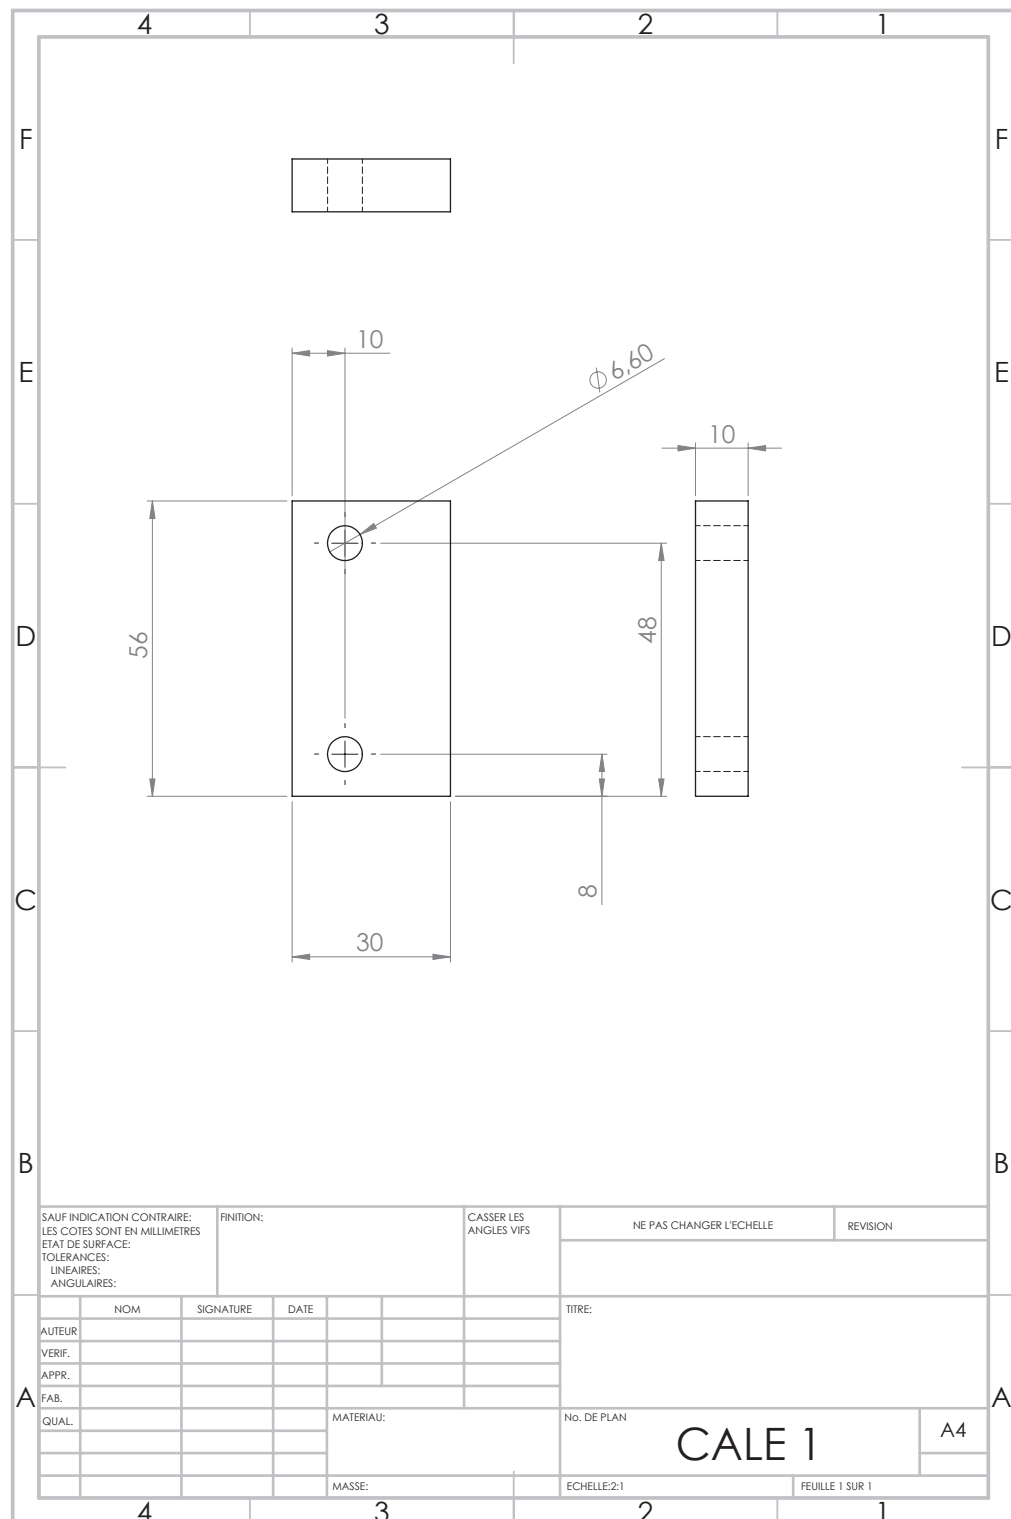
Dimensioned drawing of the wedge II (6). Provided by LAUM mechanical workshop.
